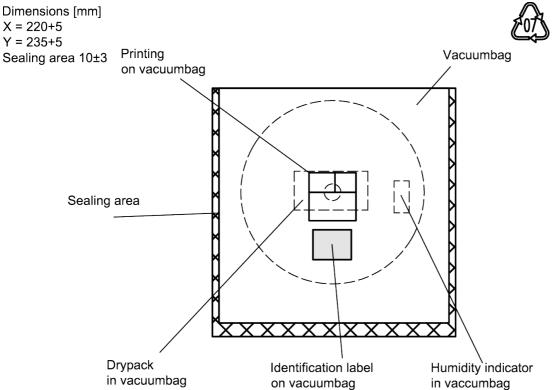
Drawing of moisture barrier bag (MBB) for reel with diameter of 180 mm.
